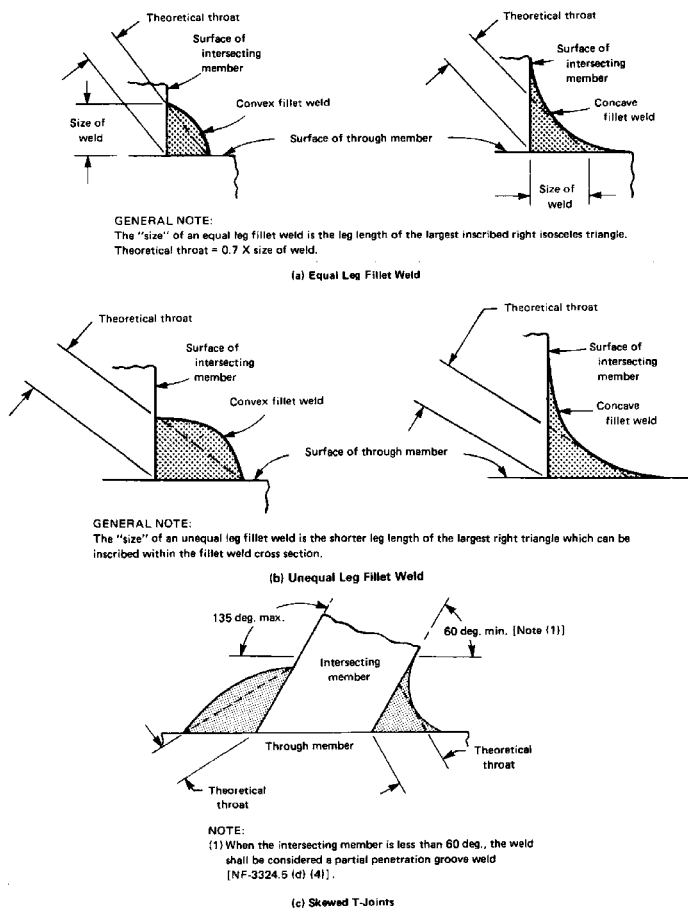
FILLET WELD DIMENSIONS
